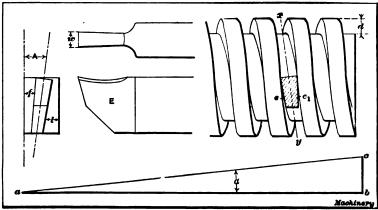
End of Square Thread Tool, and Graphic Method of Determining Helix Angle of Thread
